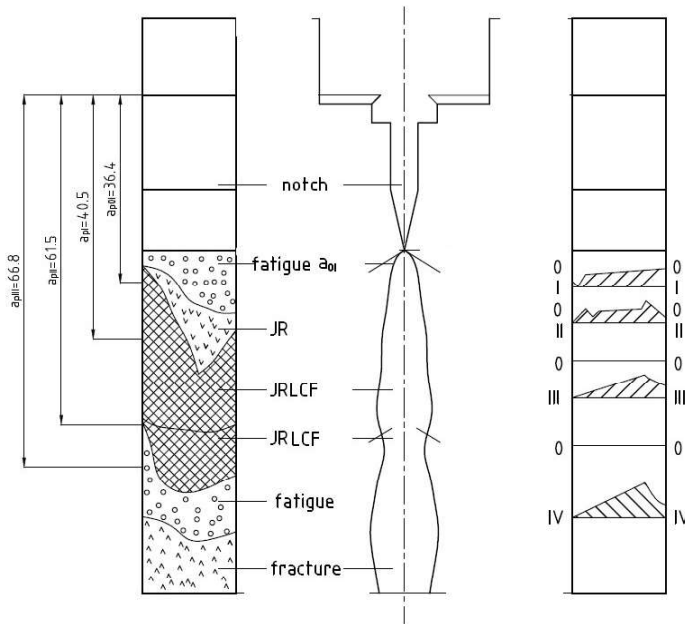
Fracture surface of CT specimen cut from WM
